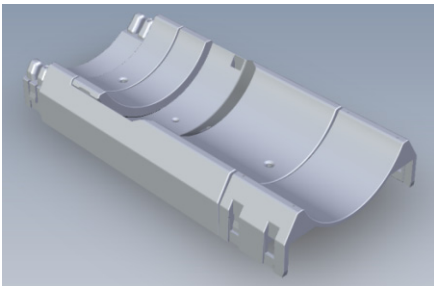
Sewage Pipe Renewable-New Plastic(RNP) Foundation
